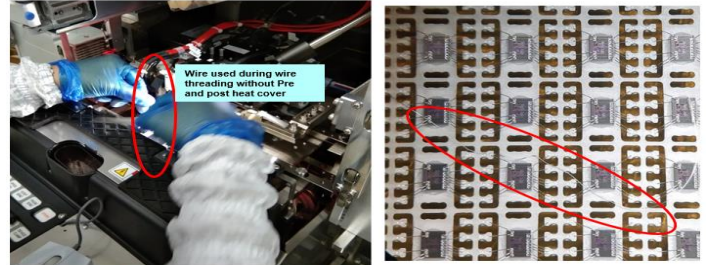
KPIV 3 Wire threading simulation with out the pre and post heat cover of the machine.
